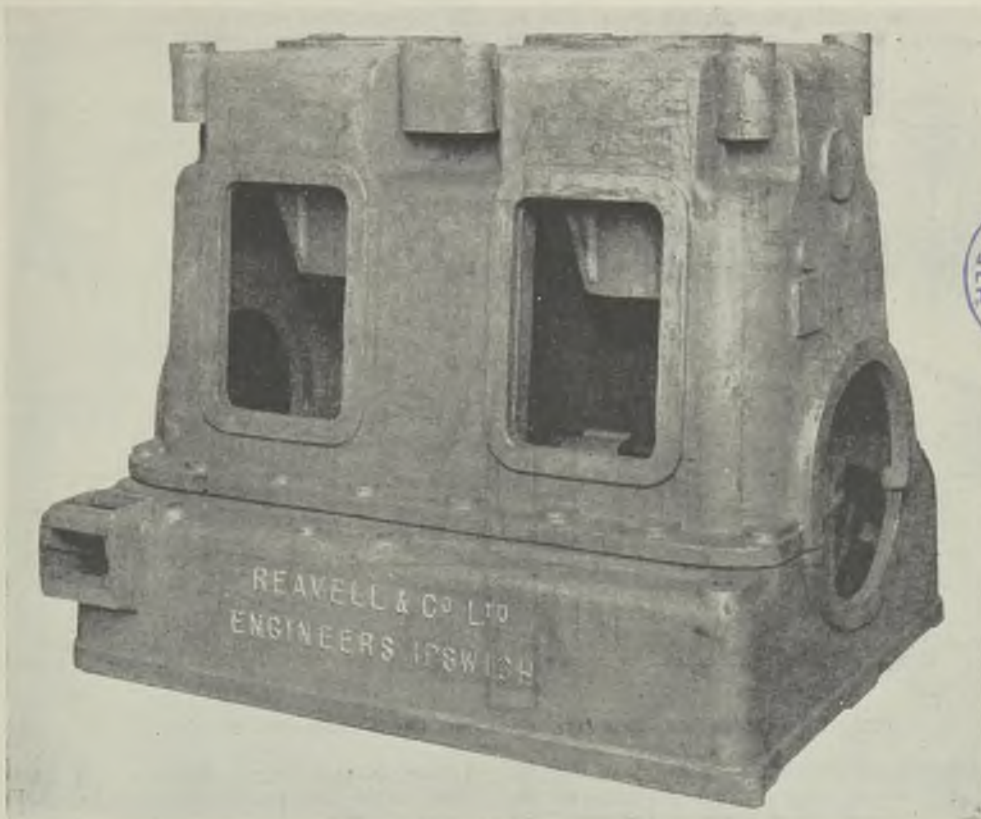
BEDPLATE DESIGNED TO CARRY CAST-IN BEARINGS.
